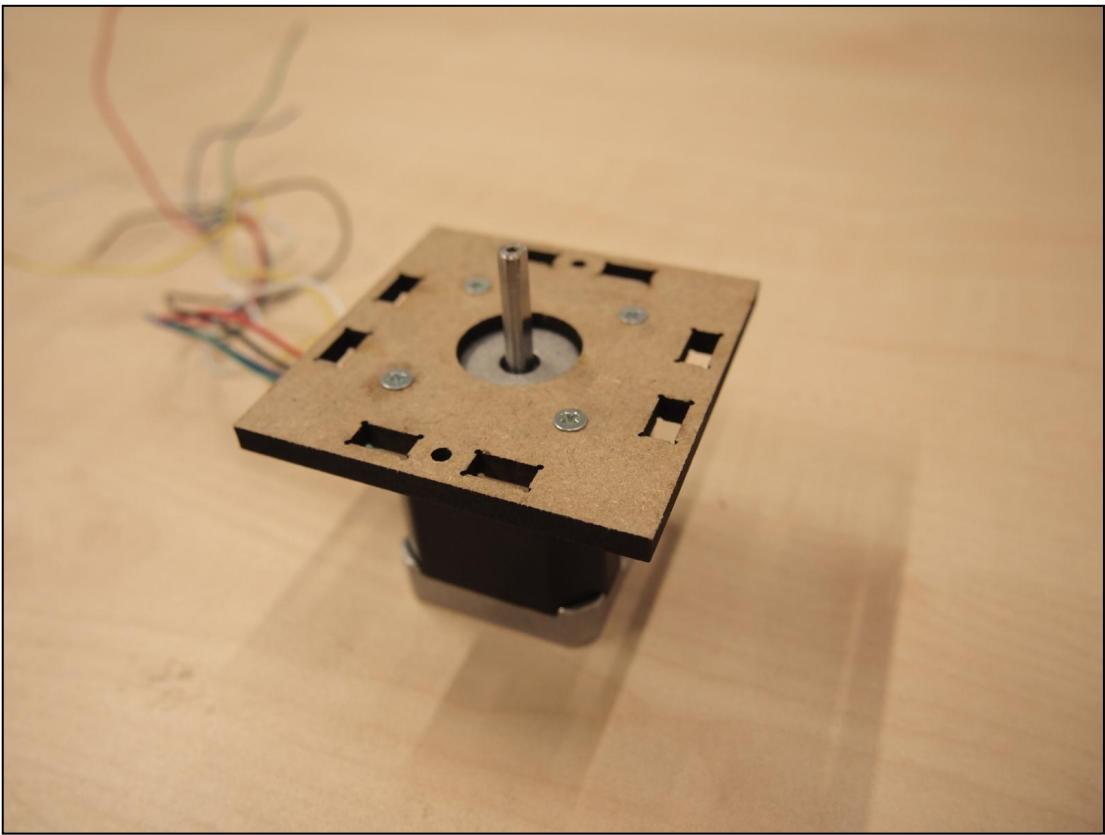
Use four DIN965 M3x8 Screws to connect the motor housing top with the Nema 17 stepper motor.
